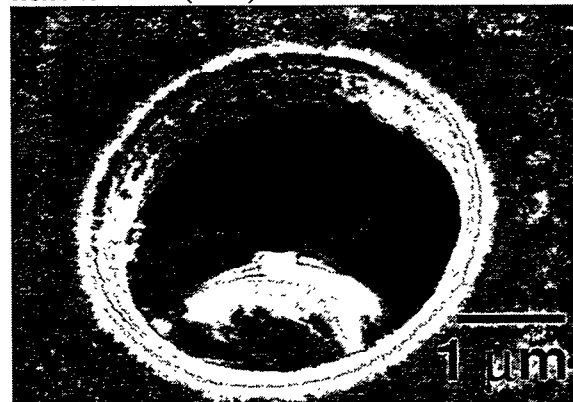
Undamaged side wall of pin hole in drive gear on control sample (SEM). This gear was not stressed.
